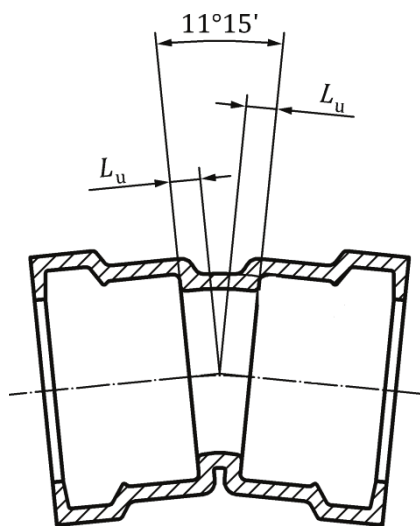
Double socket bend  $11^{\circ}15'$  (1/32)
